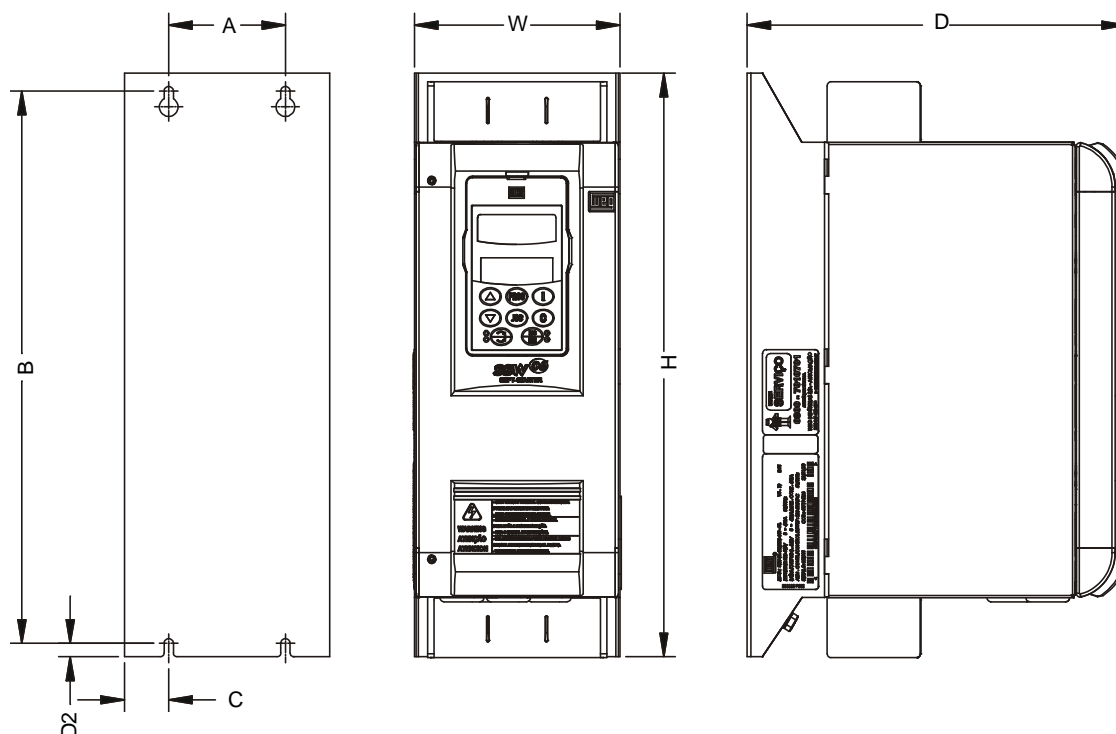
Dimensional Drawings of the Soft-Starter SSW-06
